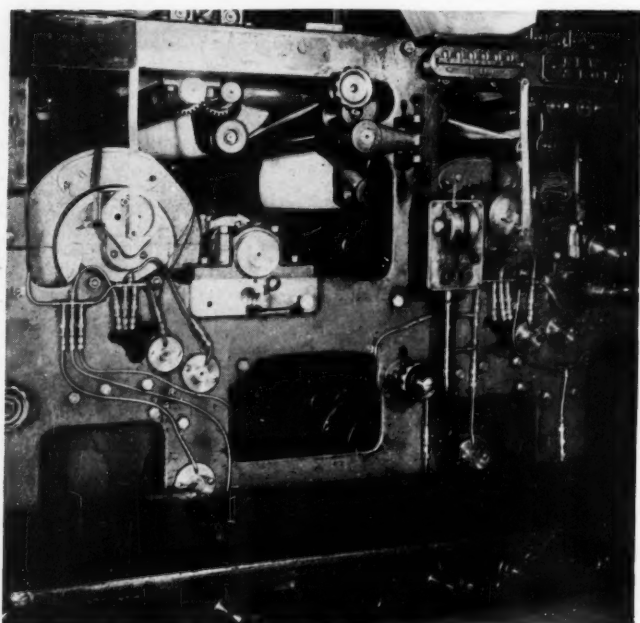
In the lubrication of printing machinery, the mechanical force feed method has been found especially adaptable
